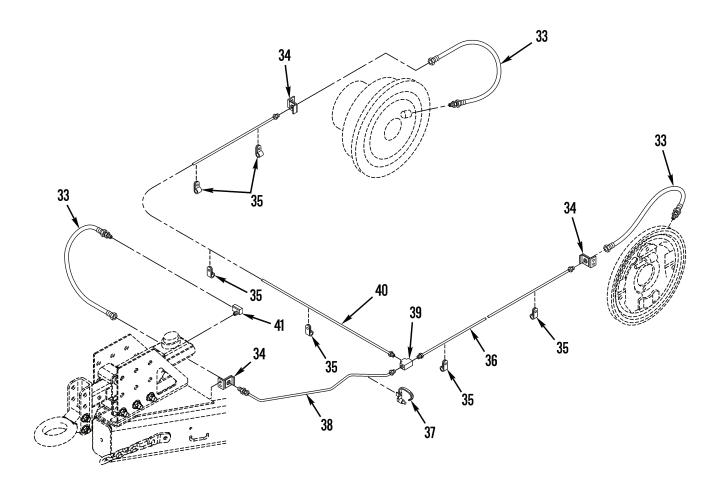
Brake Actuator Assembly (Sheet 1 of 2)
